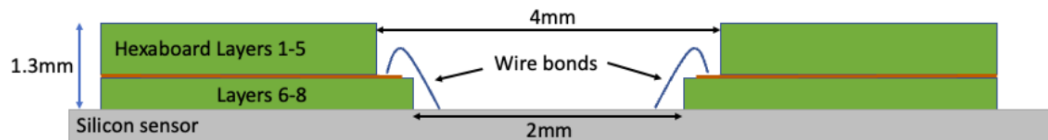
Diagram of a stepped hole in hexaboard. The first hole forming the stepped hole is 4 mm in diameter in layers 1 to 5. The second, in layers 6 to 8, is 2 mm in diameter.
